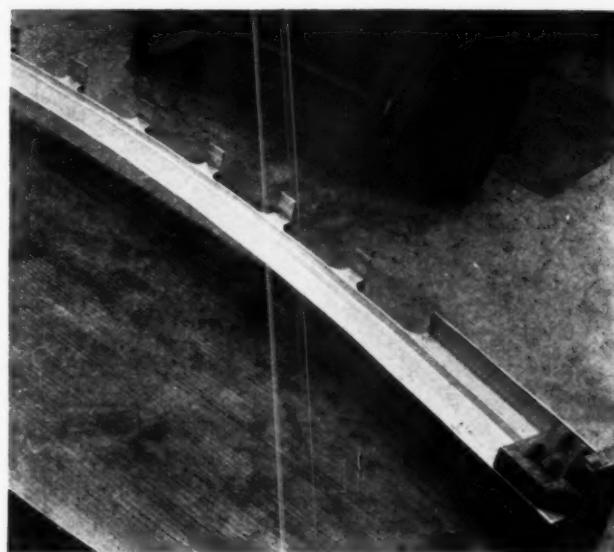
An example of the symmetrical forming done to a heavy extrusion, a wing cap member, though large cutouts were made before forming.
